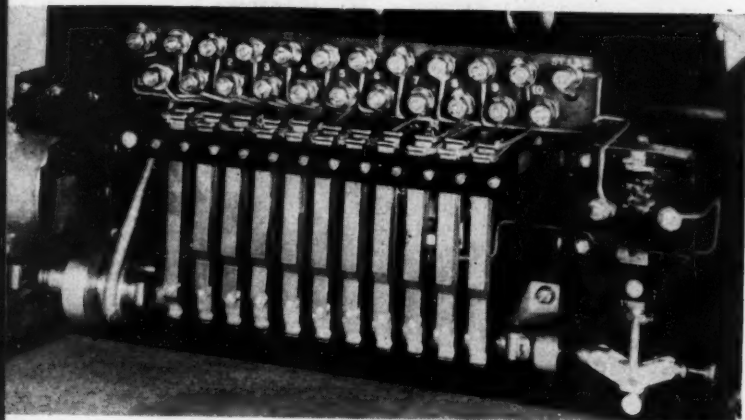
Left—Above — Metal-to-metal smooth-faced clutch (left end of cam shaft) is used on this program timer. Clutch is actuated through hollow cam shaft by solenoid at right end of timer
